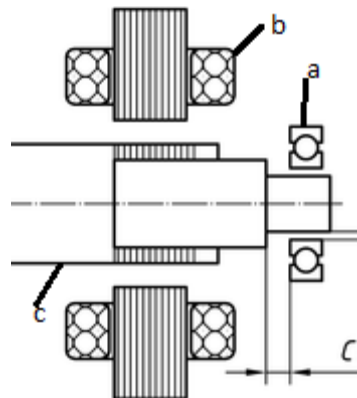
Back up bearing unit, [above, a=auxiliary bearing, b=AMB, c=rotor]
